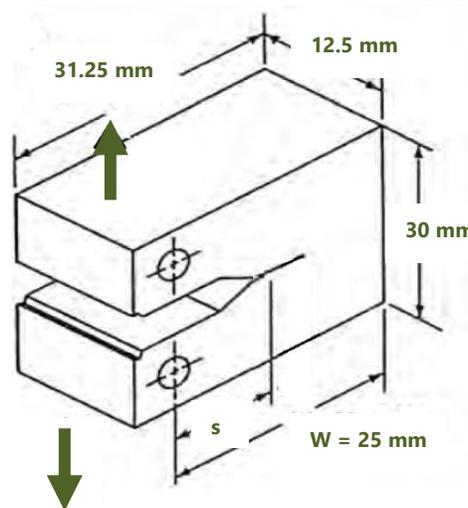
COMPACT TENSION TEST PIECE DIMENSIONS
